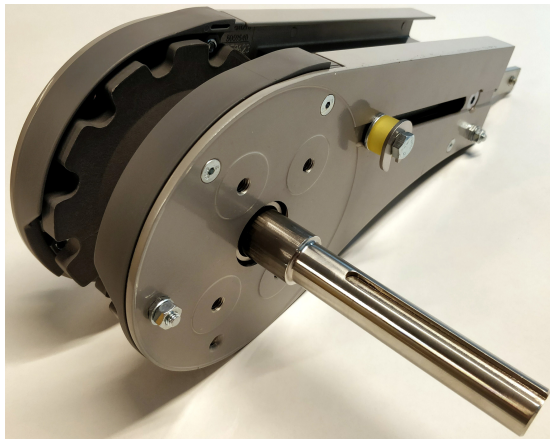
Current drive unit with polymer sprocket on a shaft, to which an external motor/gearbox combination can be attached.
